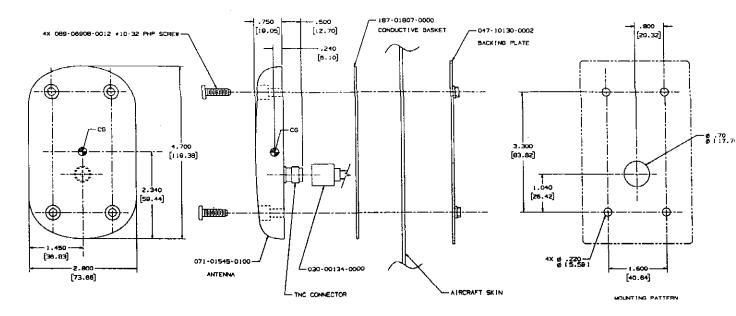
KLX 135 TRANSCEIVER/RECEIVER OUTLINE AND MOUNTING DRAWING DRAWING (Dwg No 155-05676-0000 R-1) (Sheet 2)
